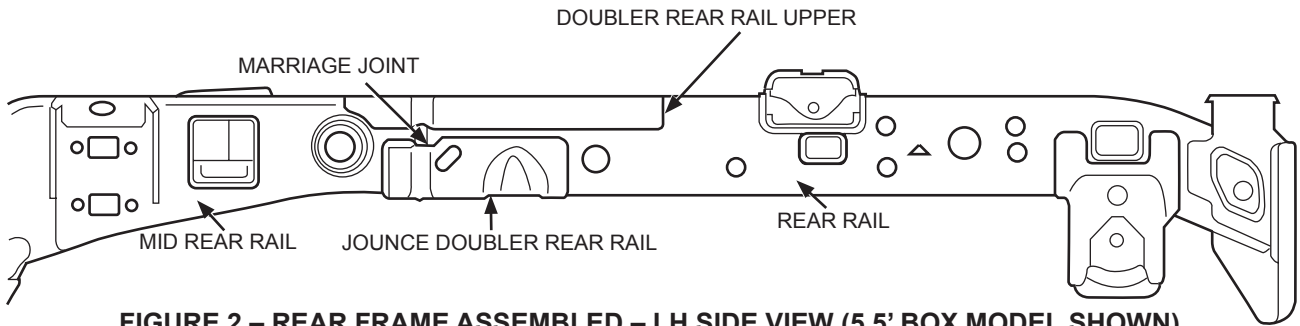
REAR FRAME ASSEMBLED – LH SIDE VIEW (5.5' BOX MODEL SHOWN)
